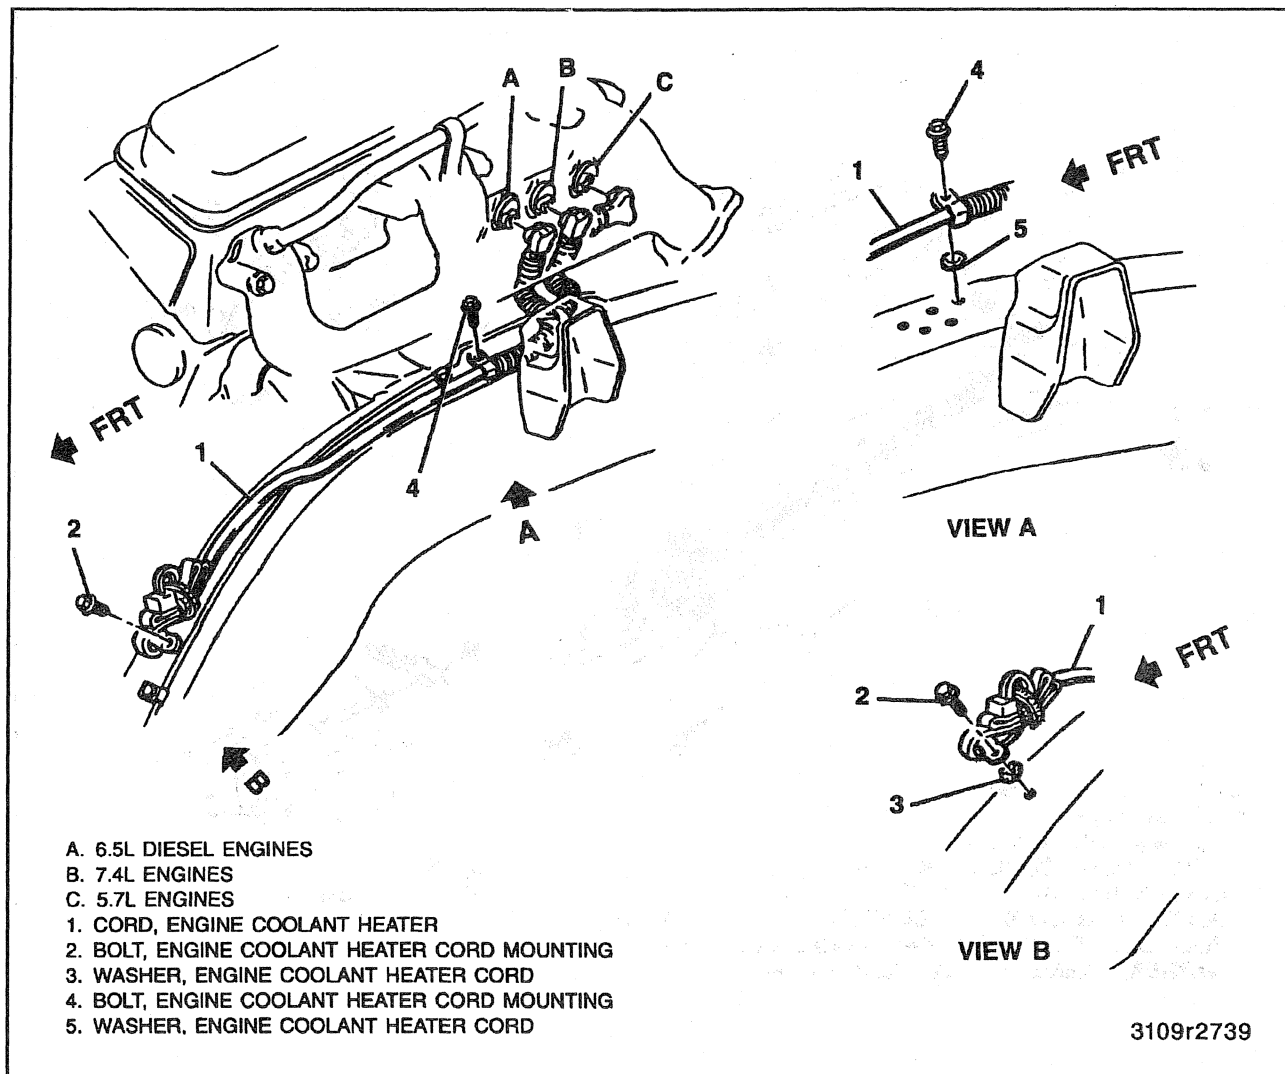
Engine Coolant Heater Cord Routing (Two-Wheel Drive - 1 Ton Models)
